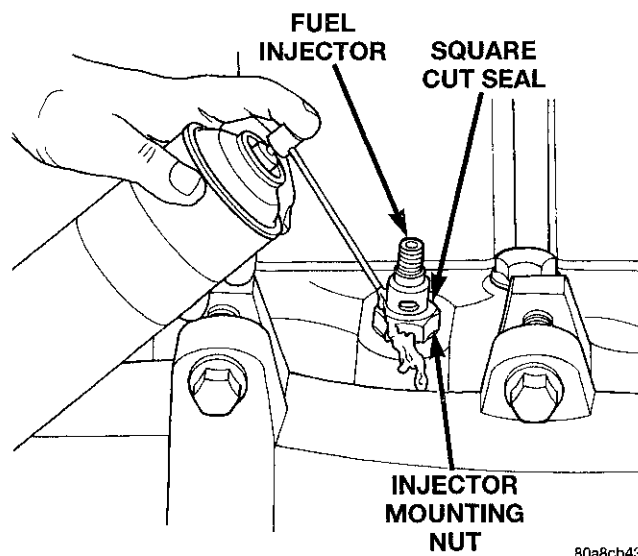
Applying Rust Penetrating Solvent to Injector Mounting Nut
